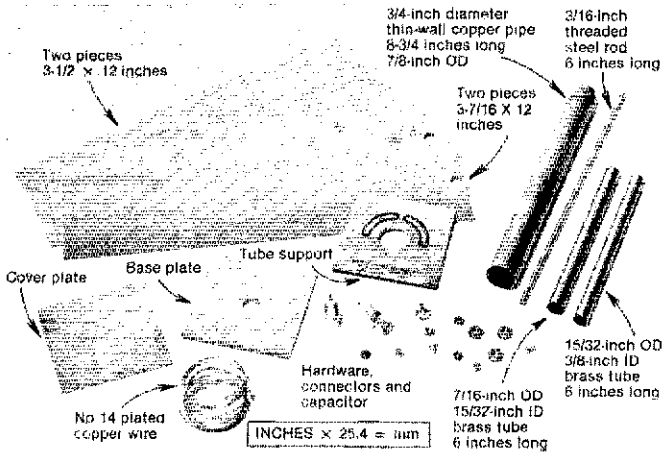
All parts needed to build a single cavity are shown in this photo. Six cavities were combined to make the duplexer shown in Fig. 1. The tube support, cover plate and base plate are all 3-7/16 inches square. The base plate center hole is 7/16 inch in diameter and the tube support hole is 7/8 inch. The top plate is cut from 1/16-inch thick, double-clad stock, while 1/8-inch stock was used for the tube support and base plate.
